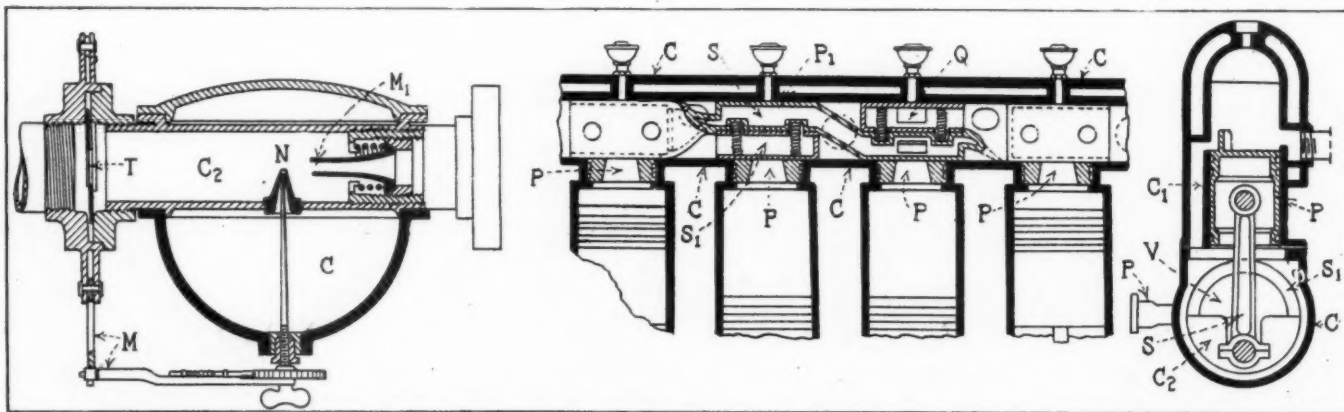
Sliger carbureter. Fig. 3—Moorhead rotary cylinder-plug valve. Fig. 4—Richman internal combustion engine
